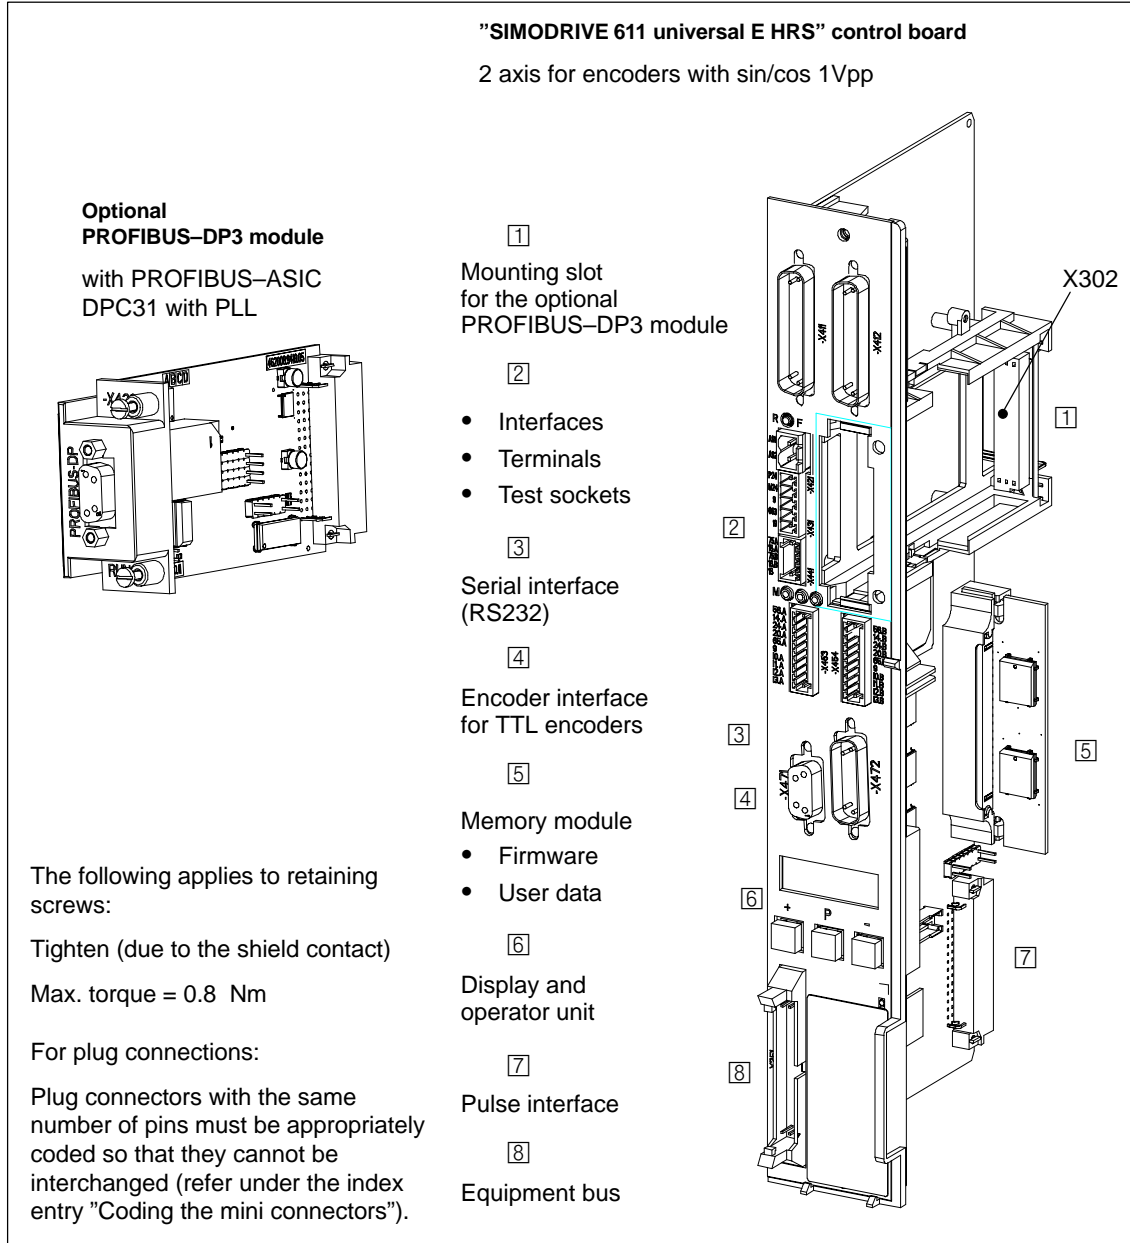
"SIMODRIVE 611 universal E HRS" control board with optional PROFIBUS-DP3 module
